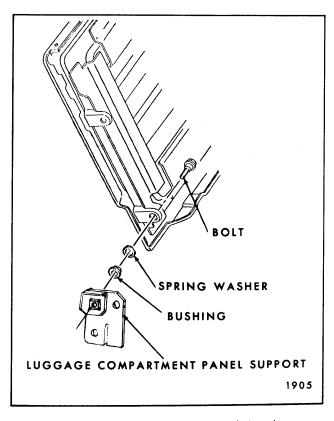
Luggage Compartment Panel Attachment to Body
